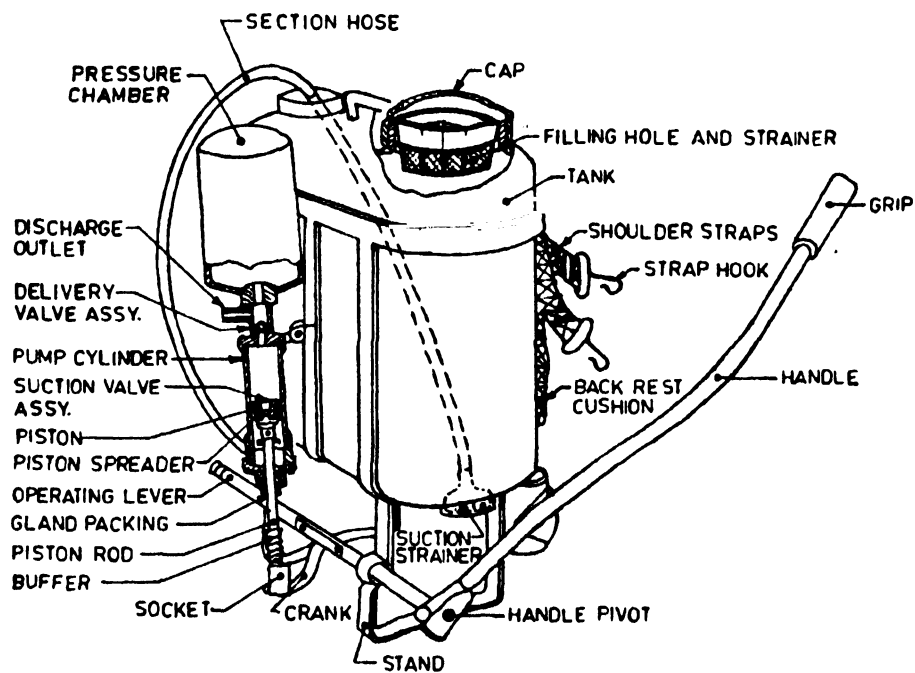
KNAPSACK SPRAYER, PUMP ASSEMBLY OUTSIDE TANK
